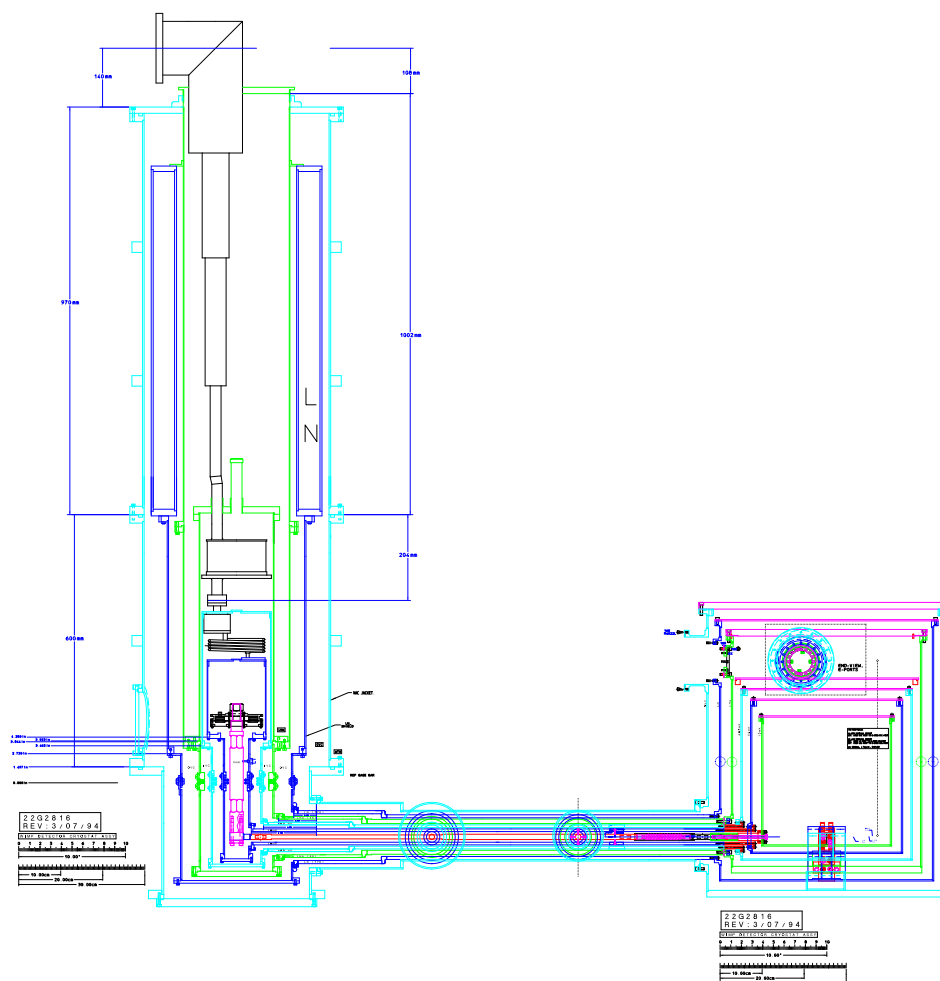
Mechanical drawing of the dilution refrigerator and Ice Box assembly.
